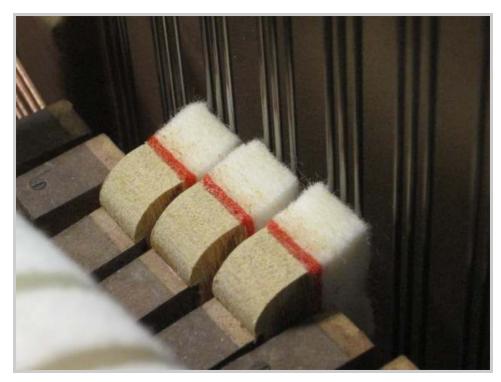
The first several dampers are installed. The strings serve as a clamp while the Titebond sets. Slight adjustment of the damper wires are made to fit the dampers to the strings from side to side, and from top to bottom.
